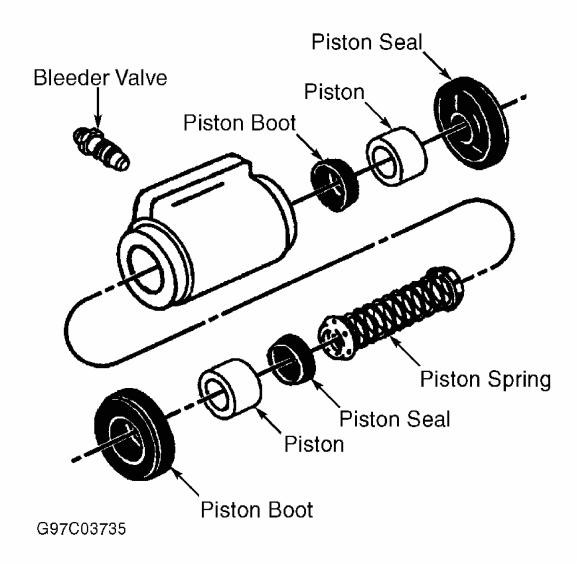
Exploded View Of Rear Wheel Cylinder (Typical) Courtesy of GENERAL MOTORS CORP.
